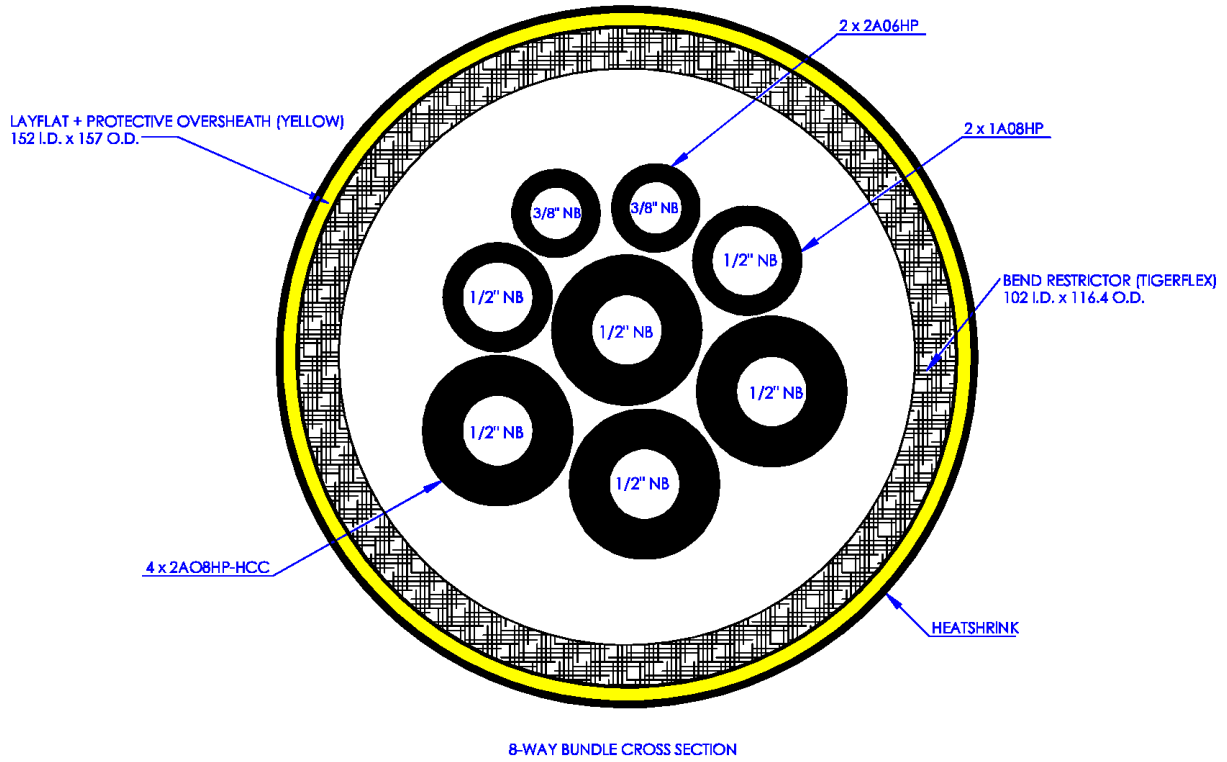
Well P3 hydraulic fly-lead PLU4976 construction
